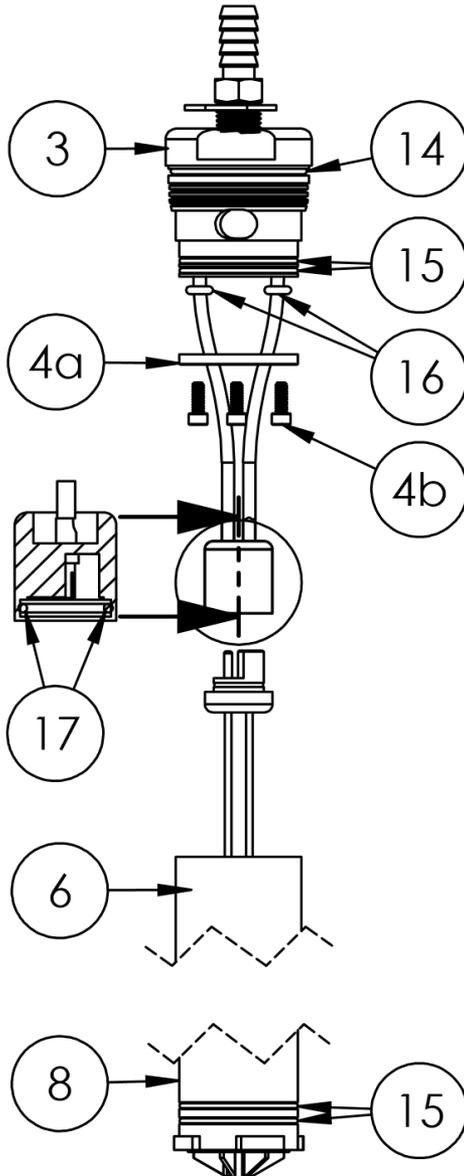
Geosub 2 Pump, O-Ring Diagram
